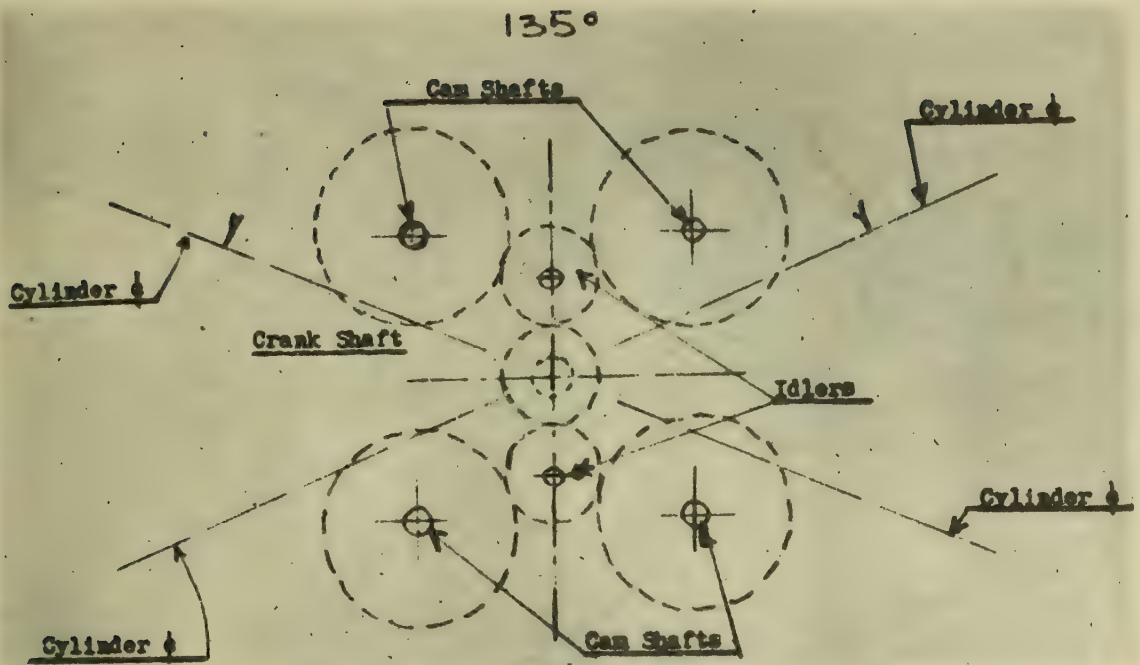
Timing Gear Drive (behind Take-off Gear Drive)
